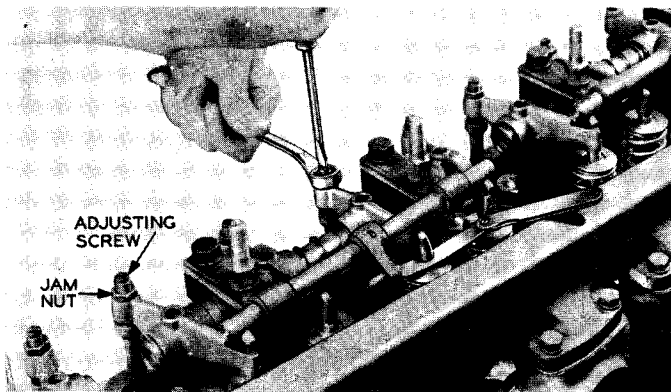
A. Checking and Adjusting Valve (Tappet) Clearance
